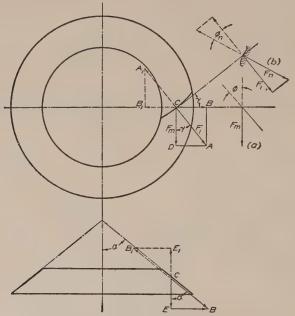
Axial Thrust of Spiral Bevel Gears.
